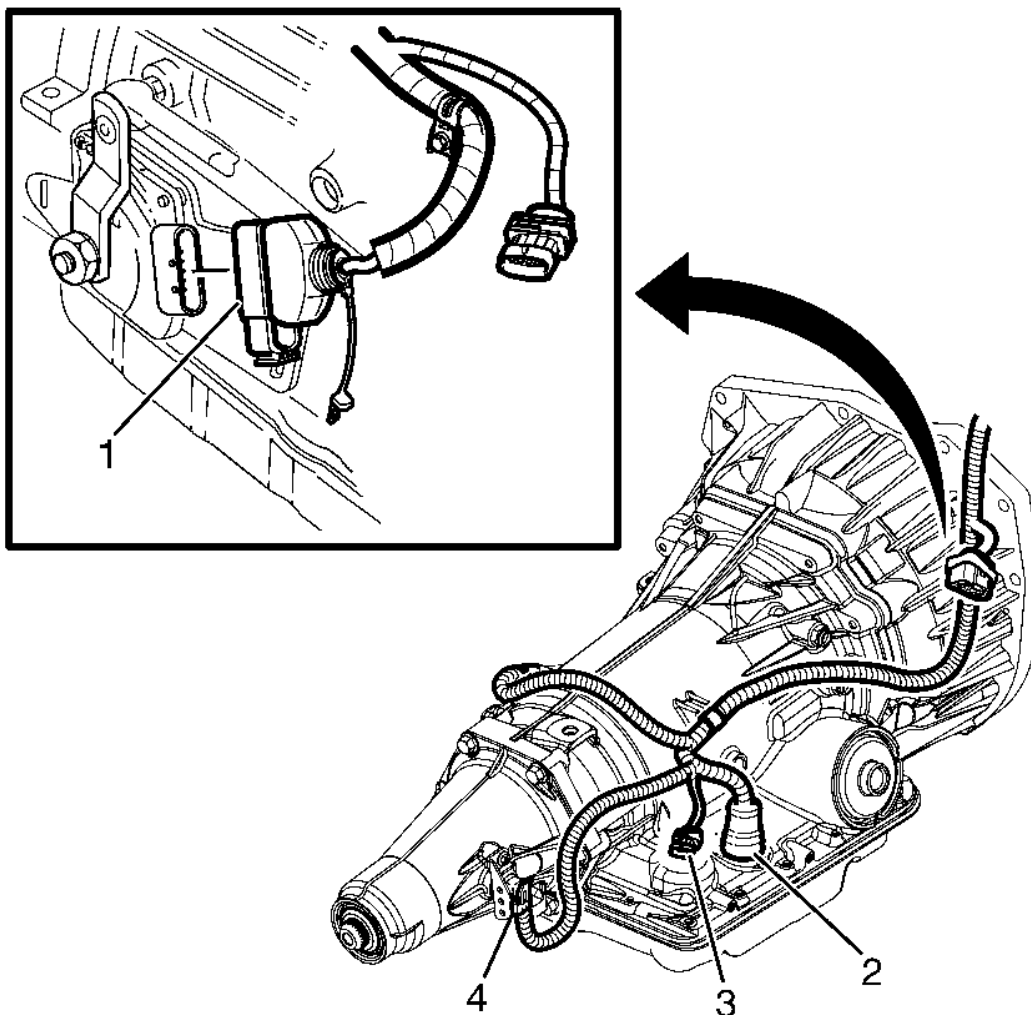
View Of Right Hand Heated Oxygen Sensor 1 & Main Transmission Electrical Connectors
